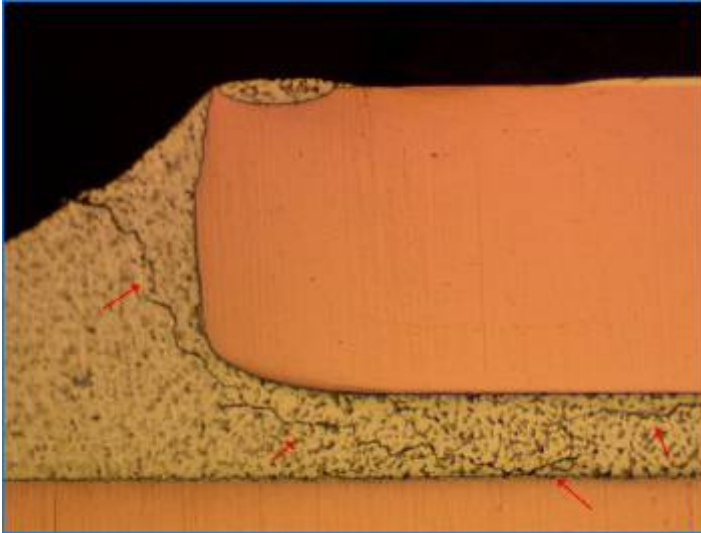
cross section, SN67, U54, left lead solder crack, 200xa
